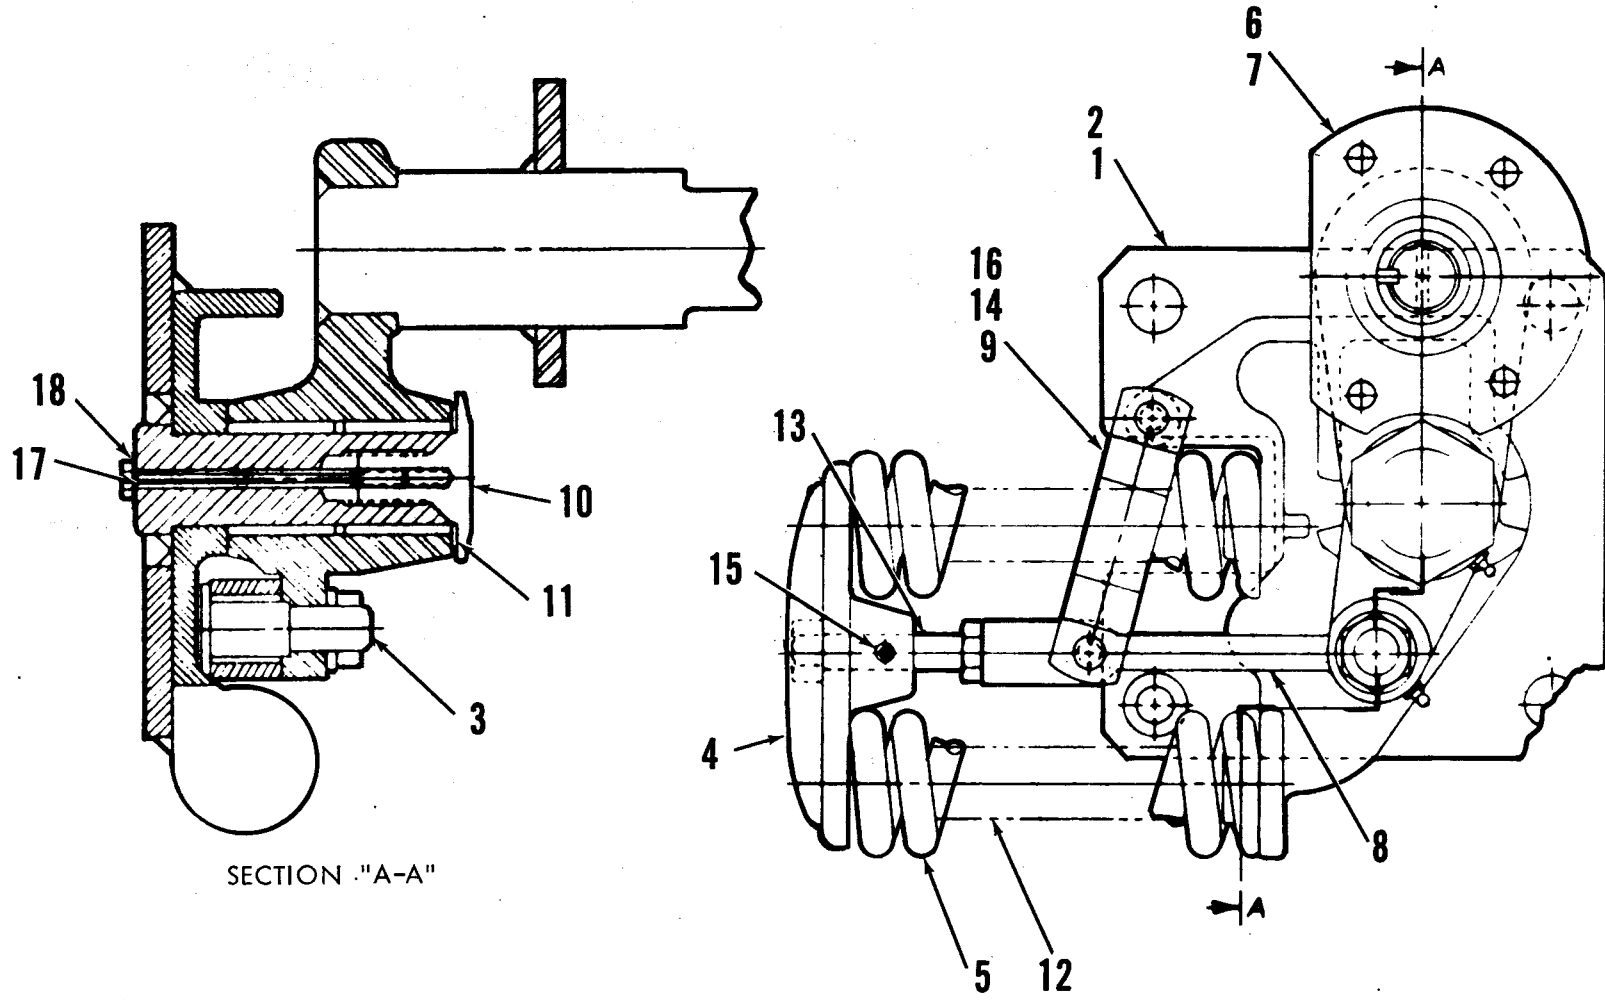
SUSPENSION ASSEMBLY, FRONT
